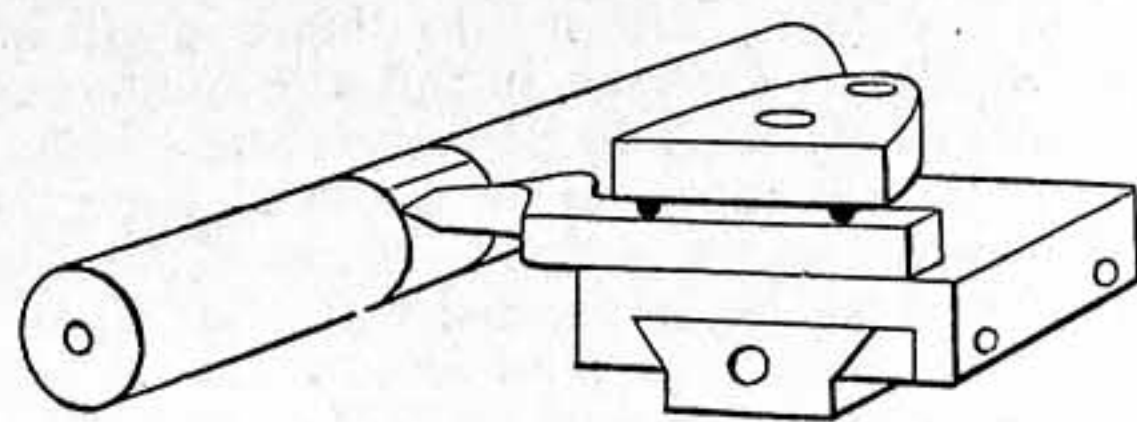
Marking Parallel Lines by Fixed Tool in Slide-Rest.
